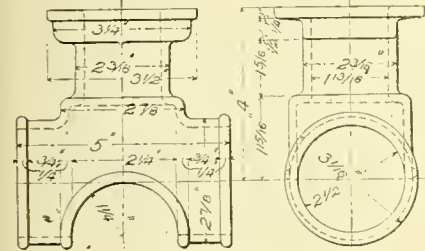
BRAKE-BEAM ADJUSTING HANGER.
